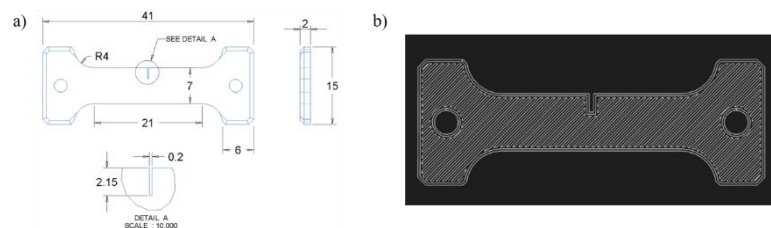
(a) Drawing of SENT part in millimeters; (b) Orientation of the nozzle during the printing step (45°/-45°).
